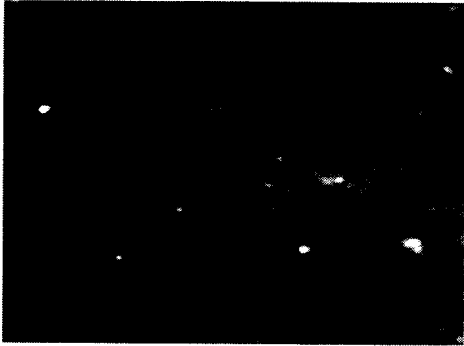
Grinding wheel surface image of 30 passes Grinding
